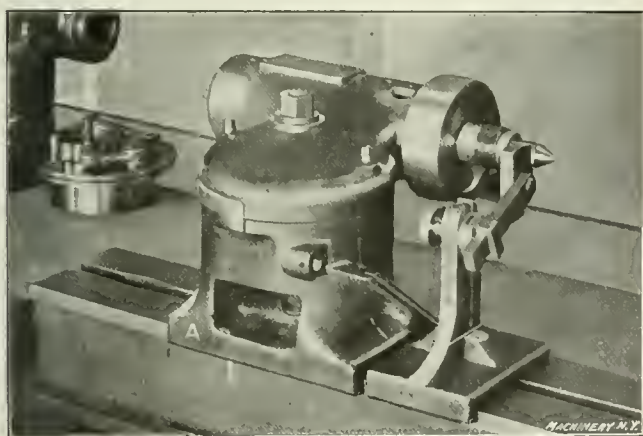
Testing Parallelism of Spindle with Locating Projection in Front
